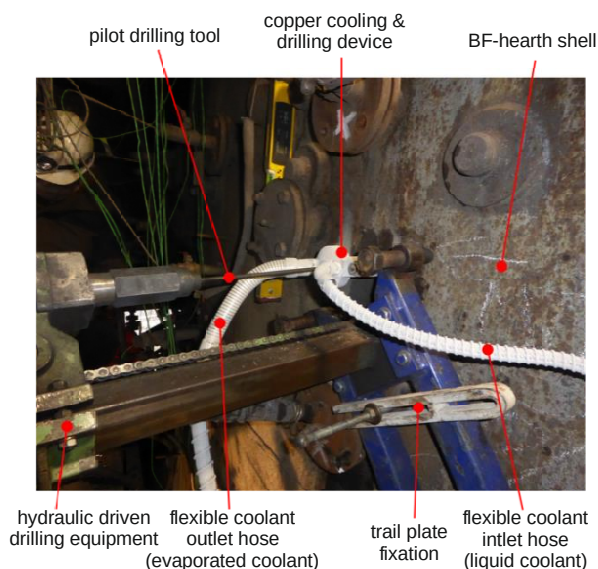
Safety Pilot Drilling Work on BF-Hearth Side Wall
